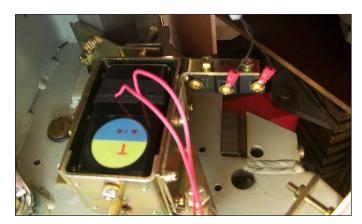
External Harness Wires Connected to the Auxiliary Switch.
